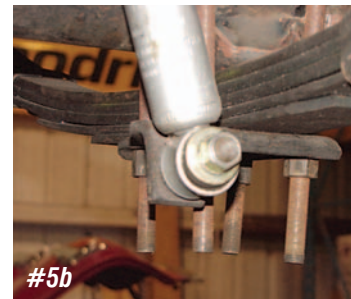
& 5b: The rear end housing is held to the leaf springs with two U-bolts on each side. The U-bolts wrap around the rear end and hold the lower shock plate in place.
